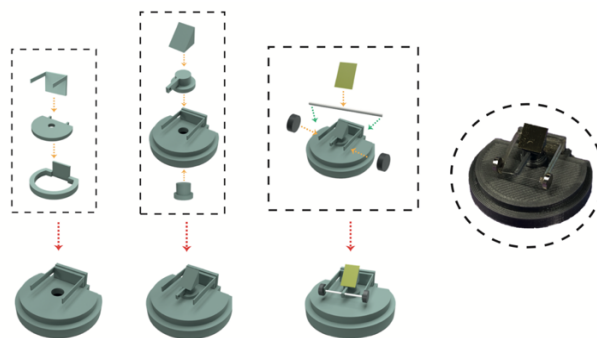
Manufacturing and assembly steps of the developed rotary actuator [1]³
